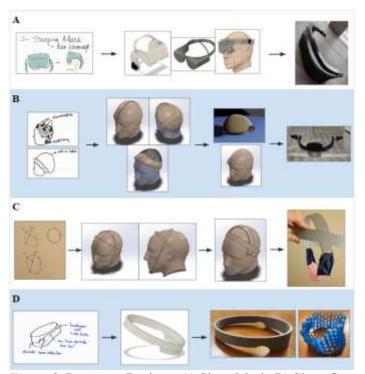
Prototype Designs. A) Sleep Mask. B) Sleep Cap. C) Sleep X/Y. D) Sleep Headband.
